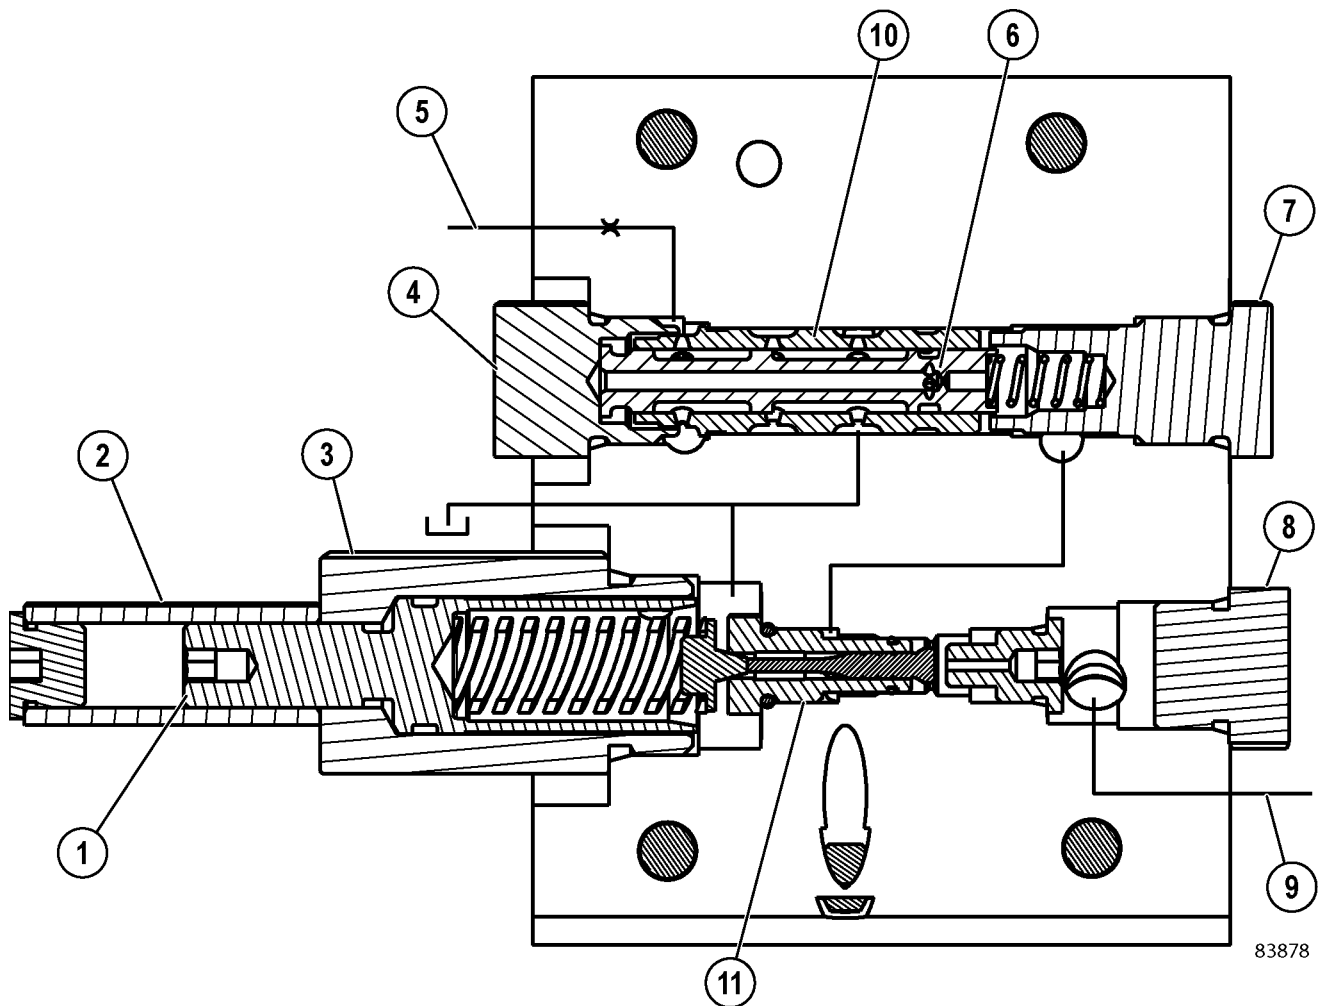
CONTROL VALVE ASSEMBLY
